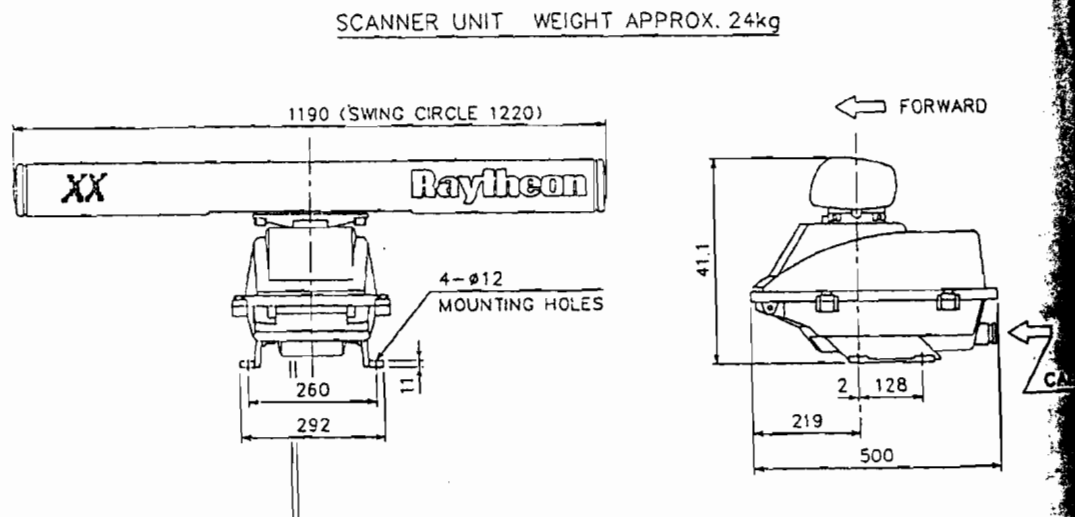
OUTLINE DRAWING - Open Array Antenna
